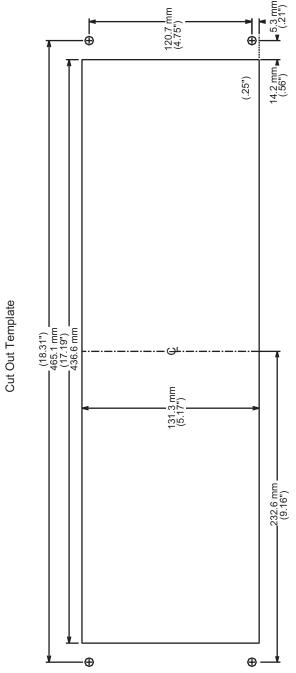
Cut-out Template(rack-mounted TESLA model 2000)
